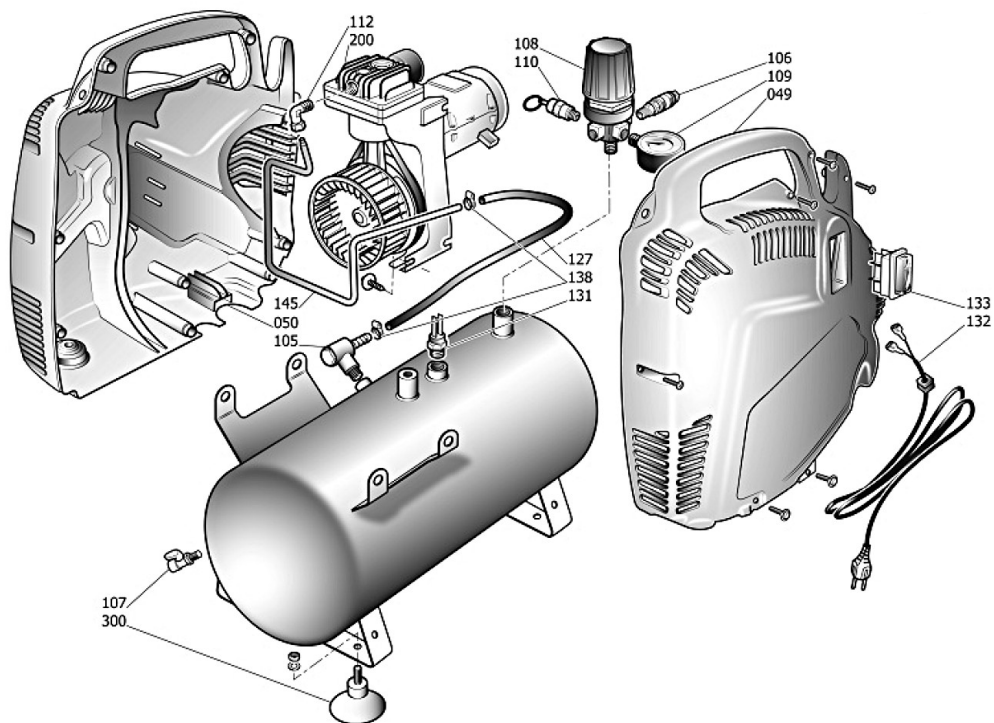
Spare parts drawing AIRBOY 206 OF E
